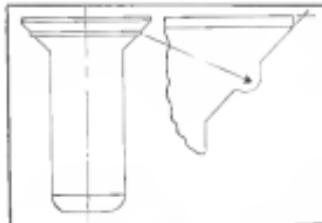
Boeing Bell Ring Rivets-in hollowed-in head which is fastened into outer webs of counterflank hole.
